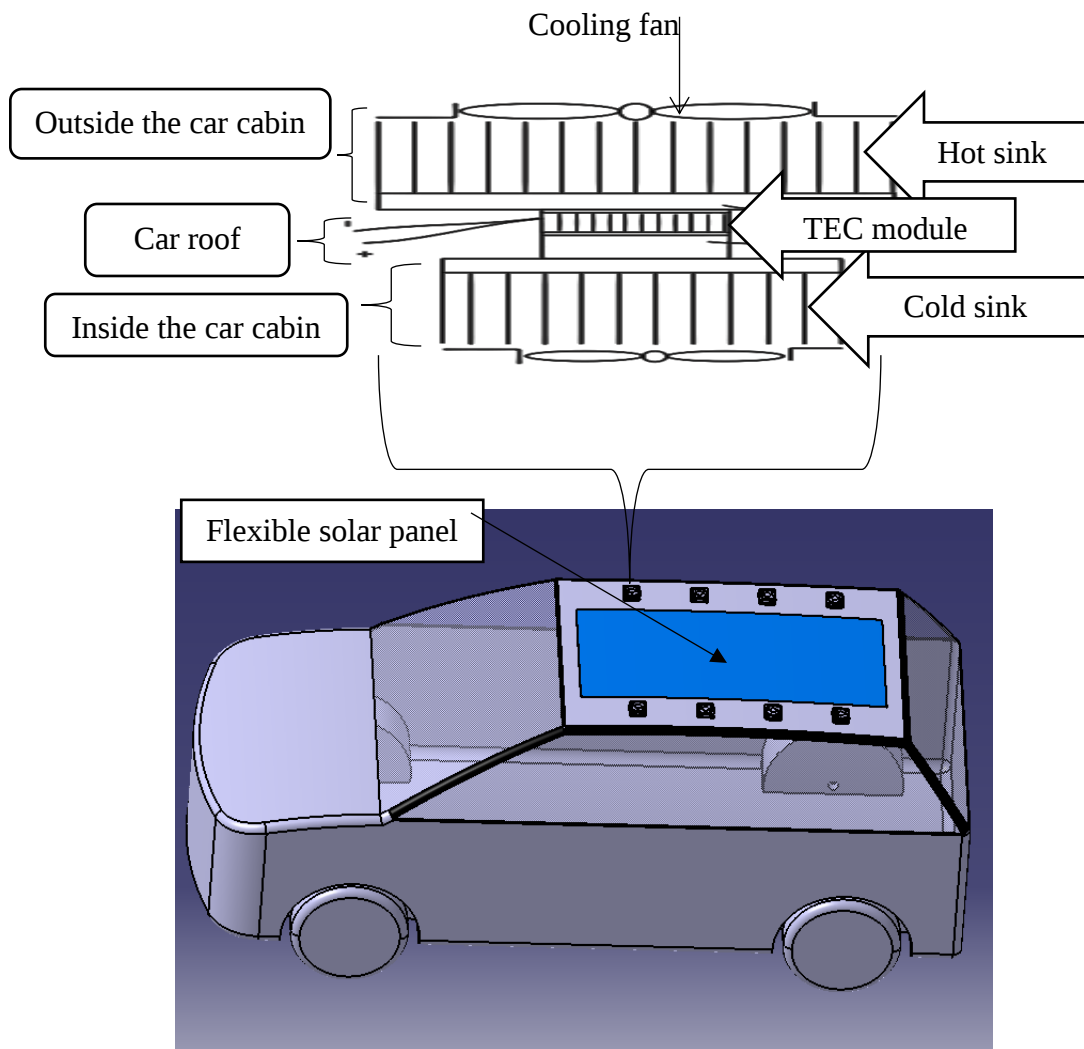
Configuration of TEC module, heat sinks, and cooling fans for the cooling system
